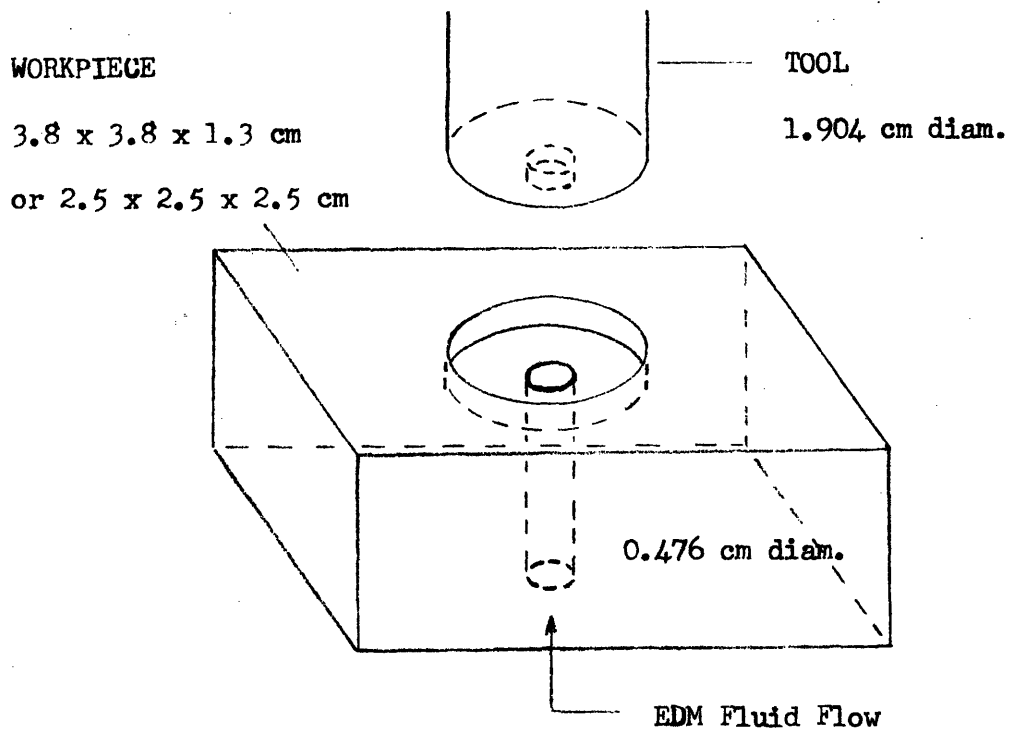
Geometry of tool and workpiece used in erosion rate tests.
